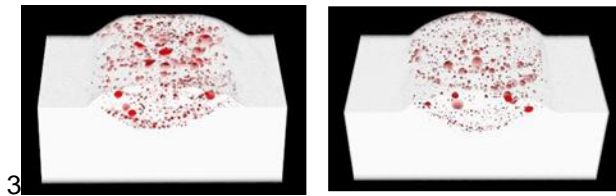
Comparison between bead welded with wire produced without chip cleaning and wire produced with chip cleaning before the FSE process.
